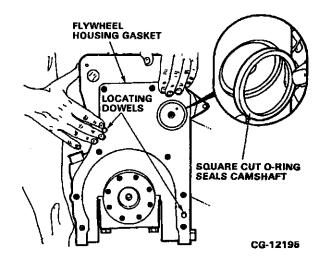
Install Flywheel Housing Gasket and Camshaft O-Ring
